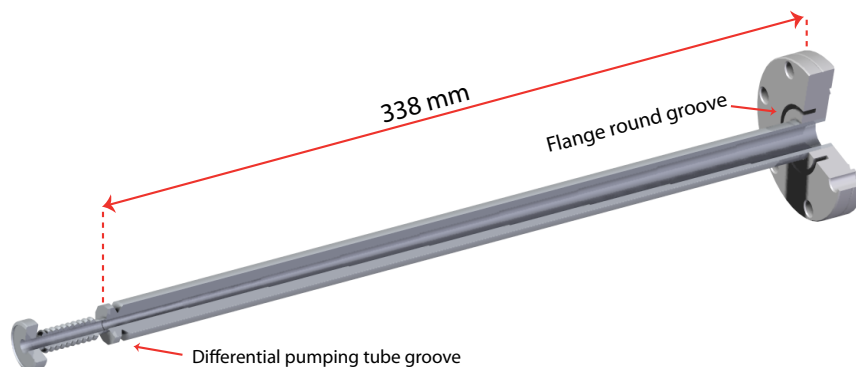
Differential pumping tube. The inner diameter of the differential pumping tube changes 9 times, from an initial diameter of 13 mm to a final diameter of 5 mm. The tube is welded to a flange with a ground groove, where the Zeeman slower coils' holding tube is embedded. A groove on the differential pumping tube itself provides additional support.
